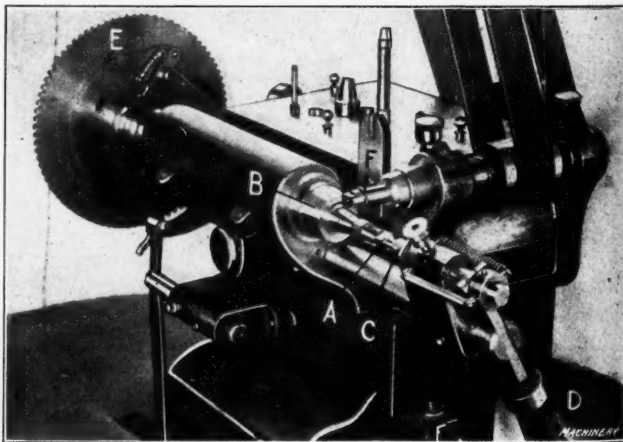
Machine for cutting the Teeth in the Brass Wheels
